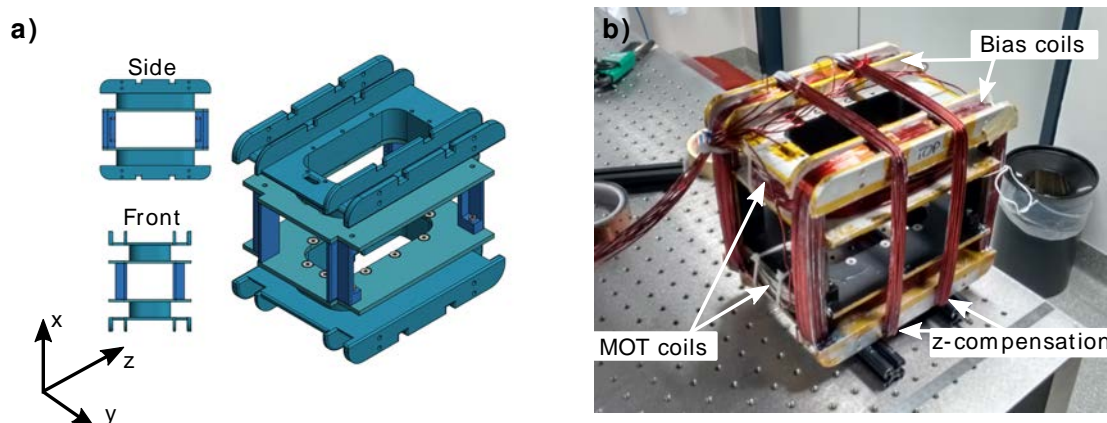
a) 3D drawing of the frame design with a side and front view on the left. The frame allows to combine three coil pairs into one rigid holder. The design was milled in several pieces and then screwed together into the final shape. b) Realization of the magnetic coil frame with the coils spun onto it. The points of contact between coil and frame were covered with isolating tape to prevent short-circuits. The frame inside was painted black to reduce spurious reflections of the MOT beams.
